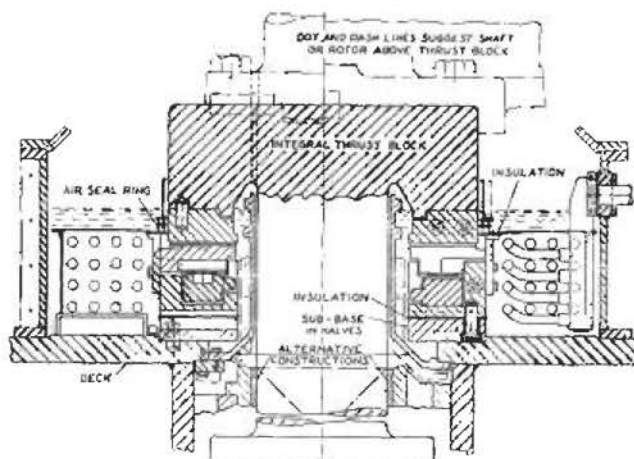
Kingsbury Thrust Bearing arranged for high-speed hydroelectric service. Alternative constructions allow the split oil seal ring to be dismantled from top or bottom, or from bottom only. See also text on Electrically Insulated Thrust Bearings, Page 11.
